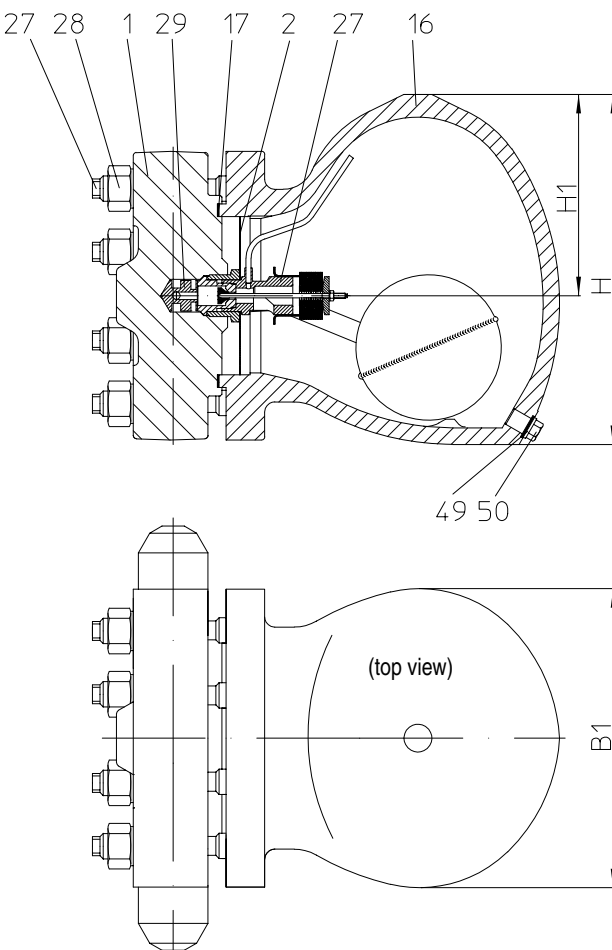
4 with butt weld ends - horizontal installation
